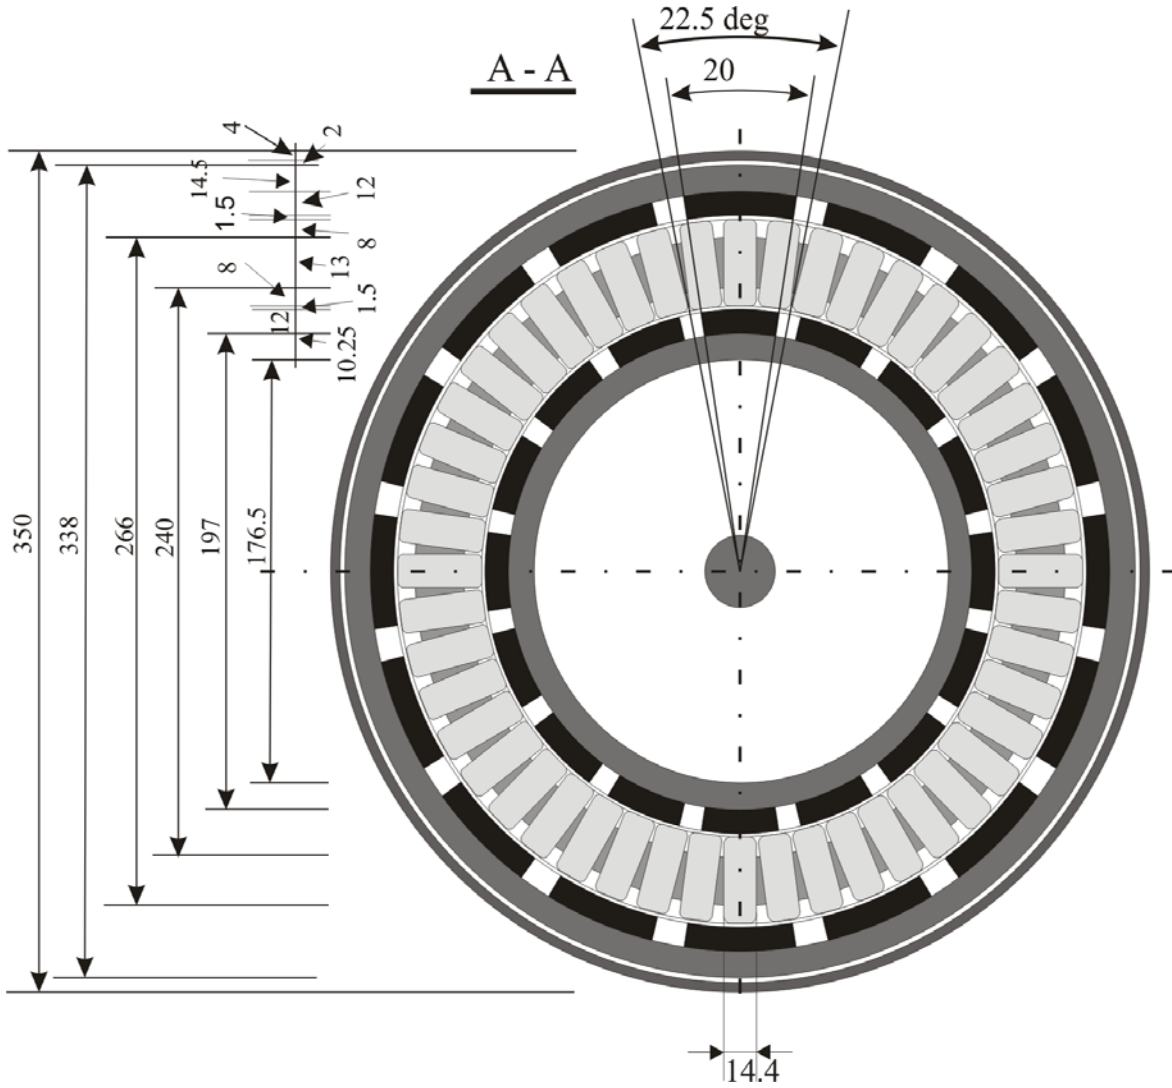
(b): Perpendicular cross-section of the RFTR PM motor
